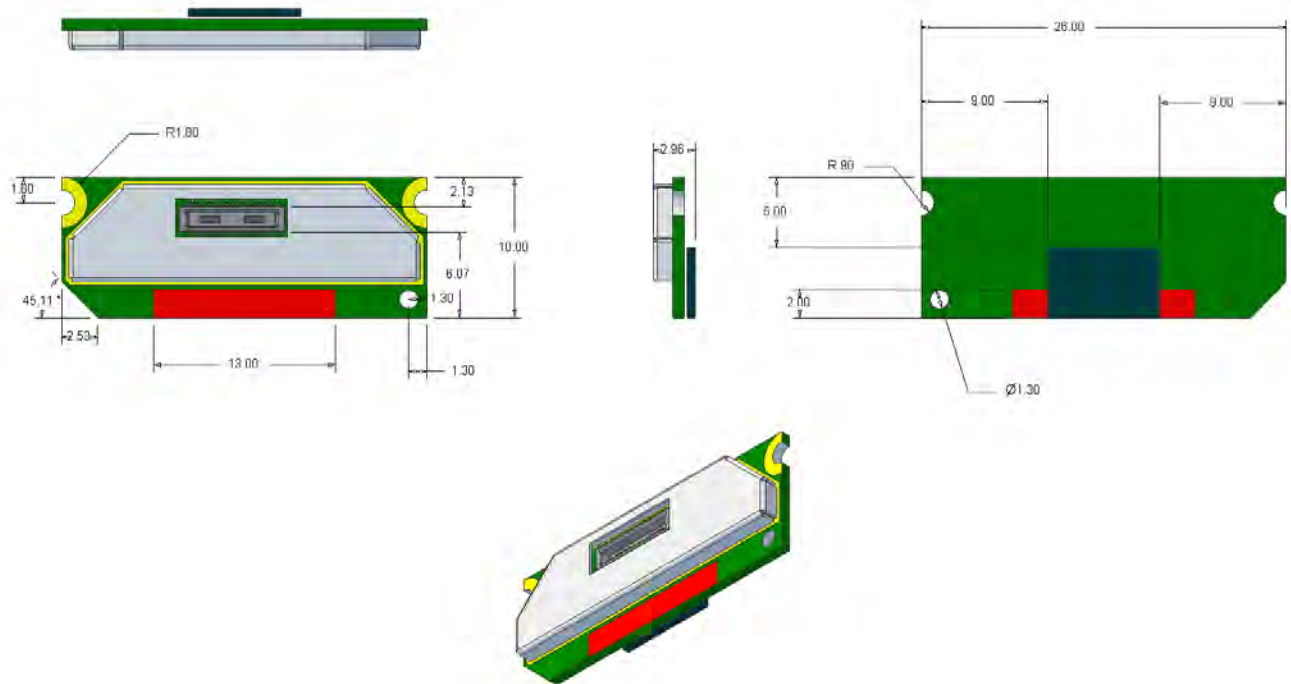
MOD6212/13 Transceiver Module Dimension (in mm)
